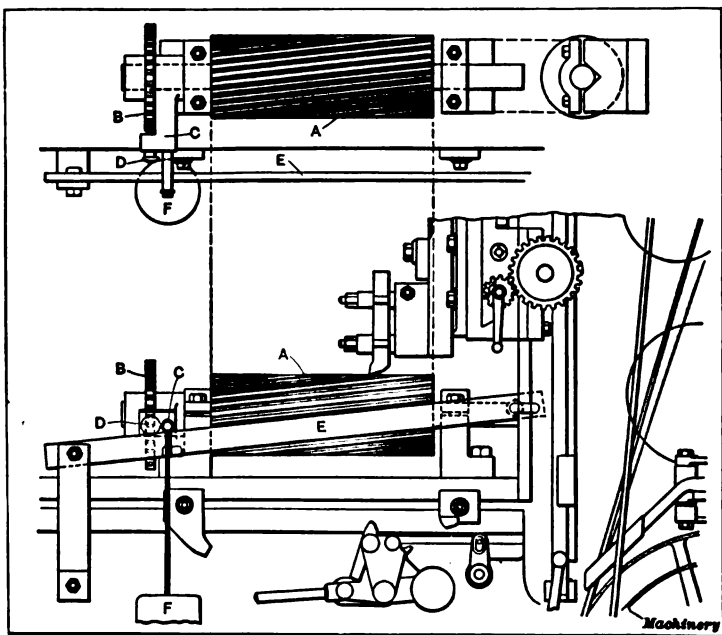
Attachment for Planing Helical or "Spiral" Flutes
